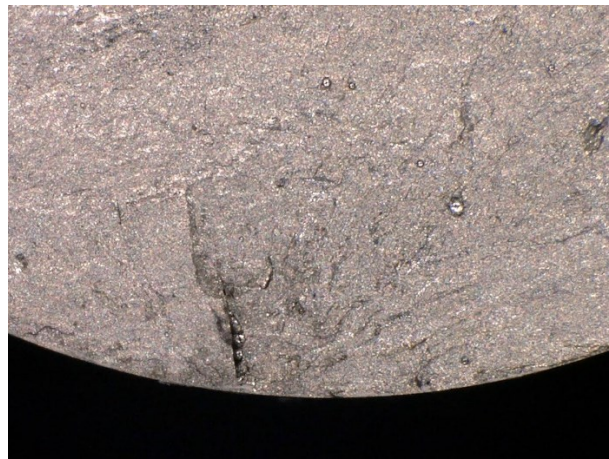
Fatigue sample 20 fracture surface with LOF defect at 50VED.
